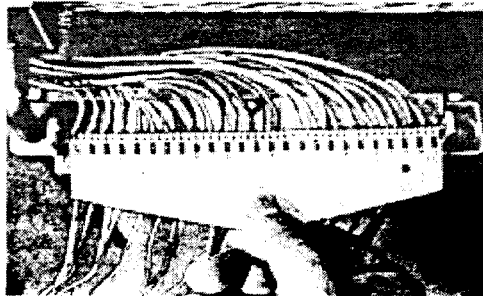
Adjusting Tool for Seating and Cutting Conductors From Index Strip
